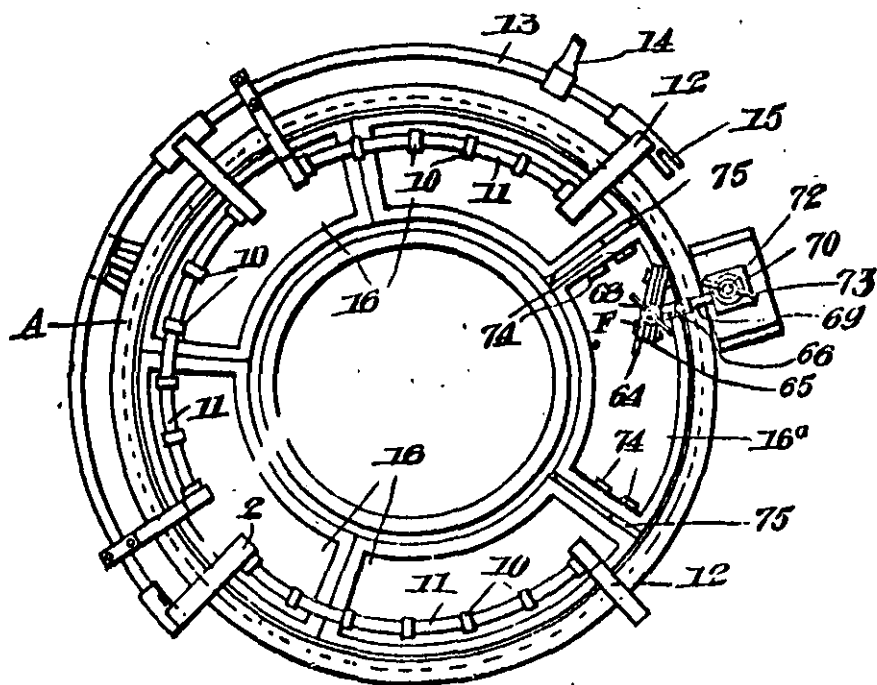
PATENTED ROTATING CYLINDER ELECTRODE for
